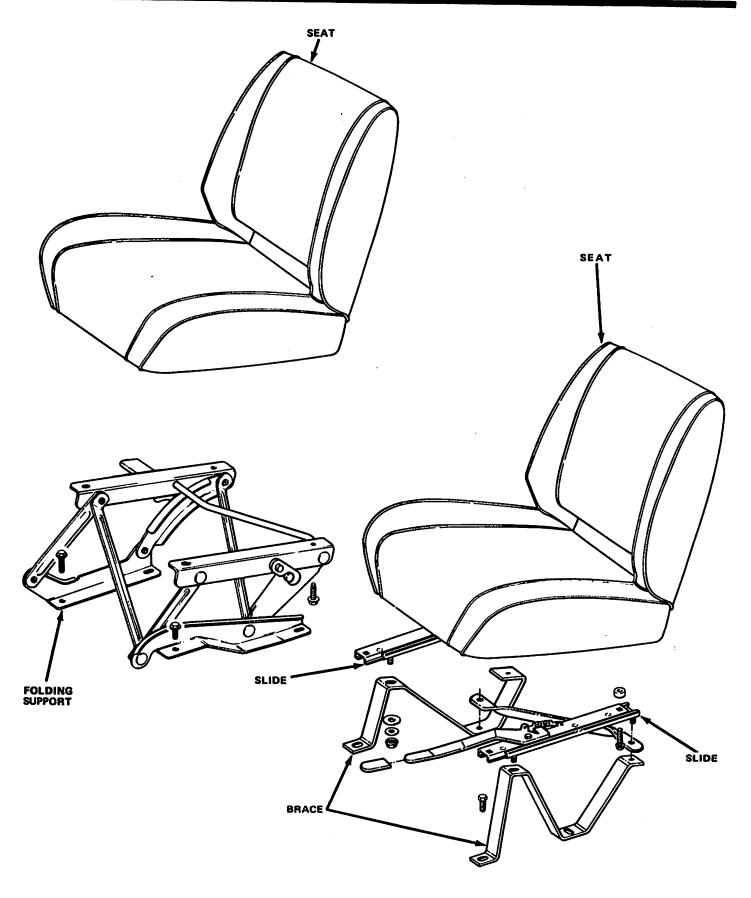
M-1 Bucket Seats—CJ and Scrambler Models
